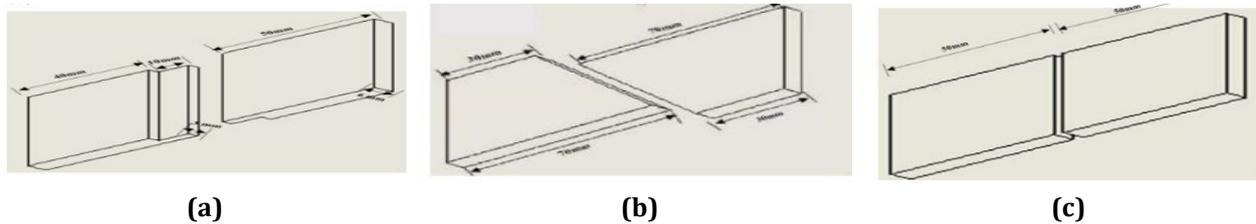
Welding joints used; (a) Half lap joint sample; (b) Bevel joint sample; (c) Butt joint sample [10]
